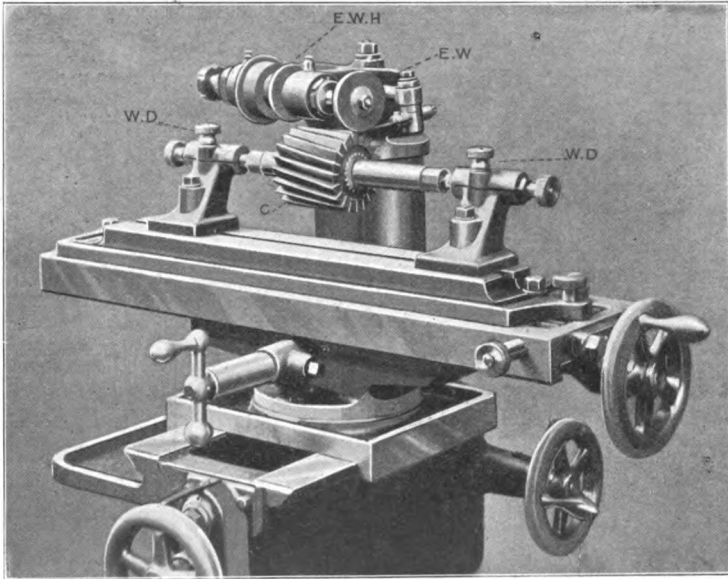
"Ward" Cutter Grinder. Sharpening a Spiral Cutter.
